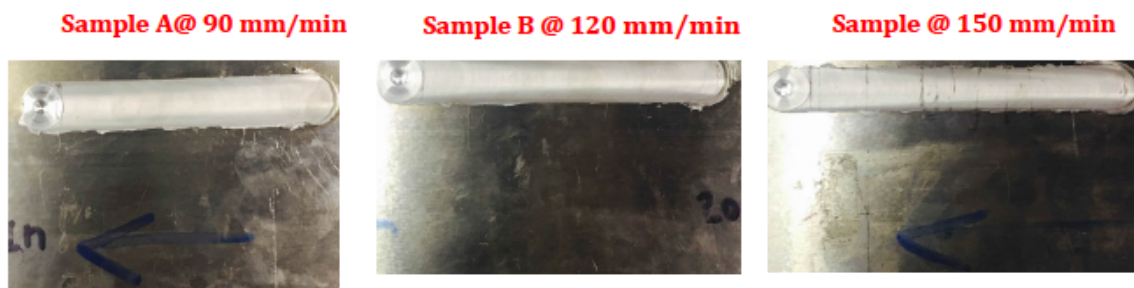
Physical appearances of Butt welded samples A, B & C
